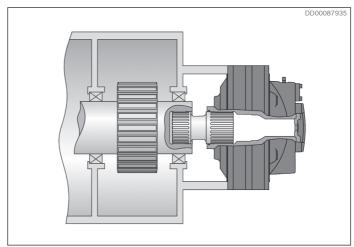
Flange mounted motor with splines to avoid high radial load from driven shaft.
